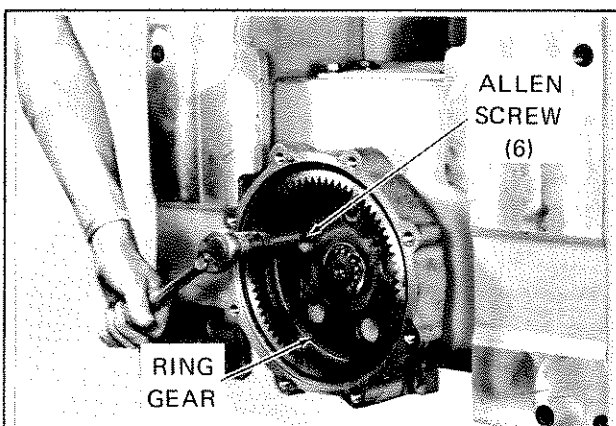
Removal And Disassembly Of PTO Shaft Assembly, Standard
